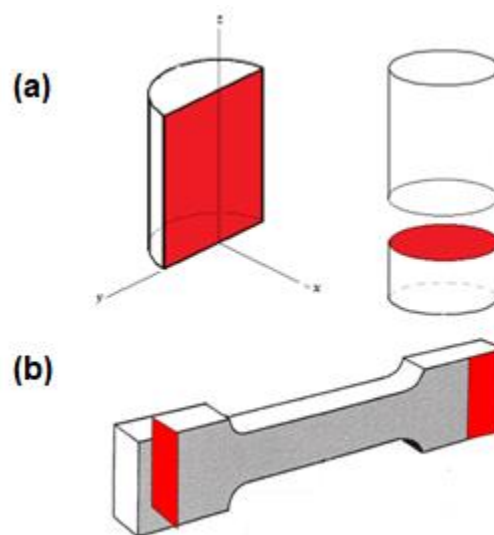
Vertical (XZ) and horizontal (XY) cross-sections of the (a) cylindrical and (b) tensile bars specimens (not to scale)
